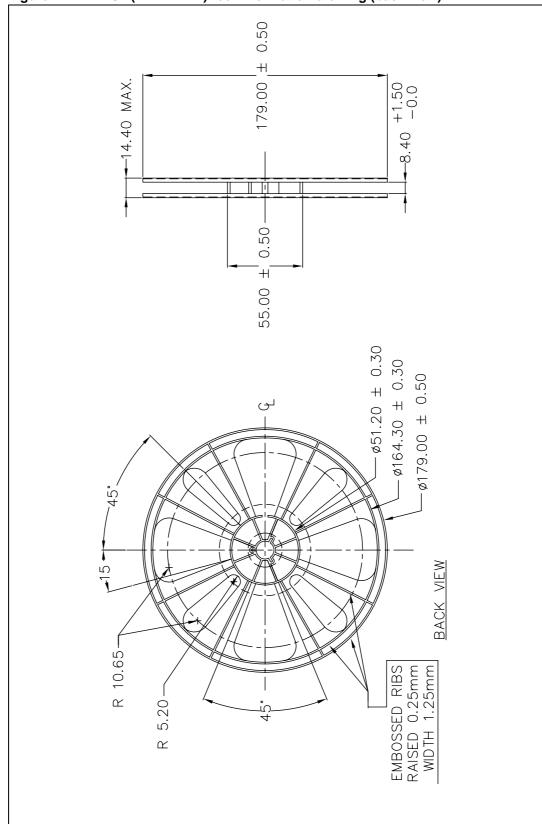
DFN6L (1.2 x 1 mm) reel information drawing (back view)
